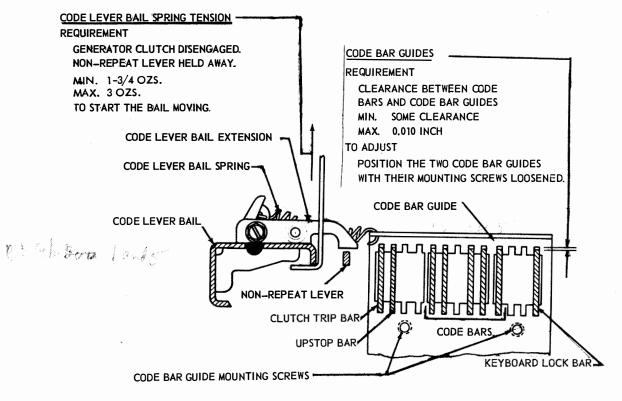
KEYBOARD, CODE BAR MECHANISM, LEFT SIDE VIEW
